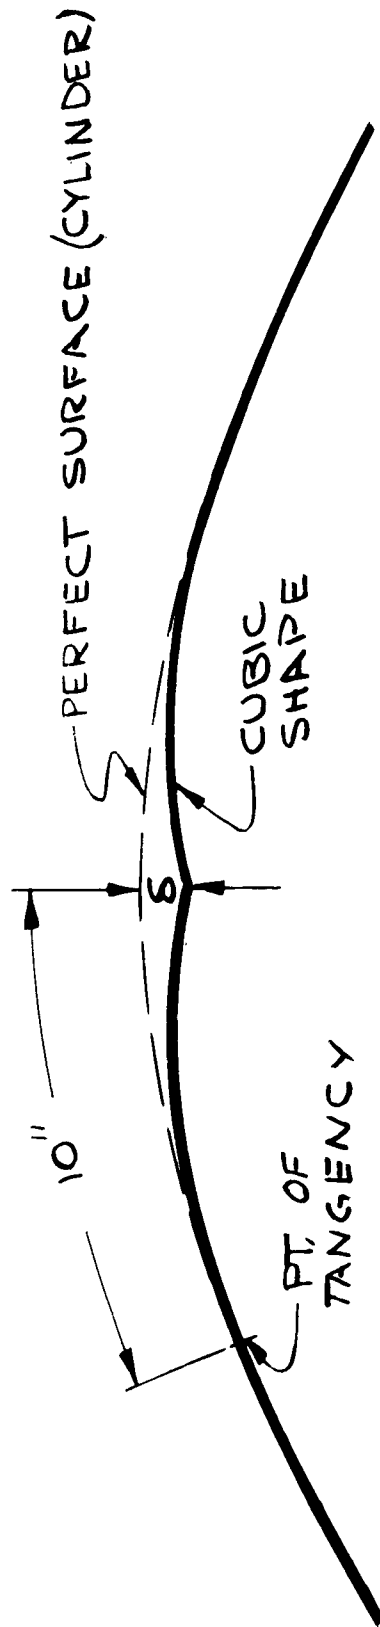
ANGULAR MISMATCH CONFIGURATION ASSUMED FOR LONGITUDINAL WELDS IN CYLINDERS
